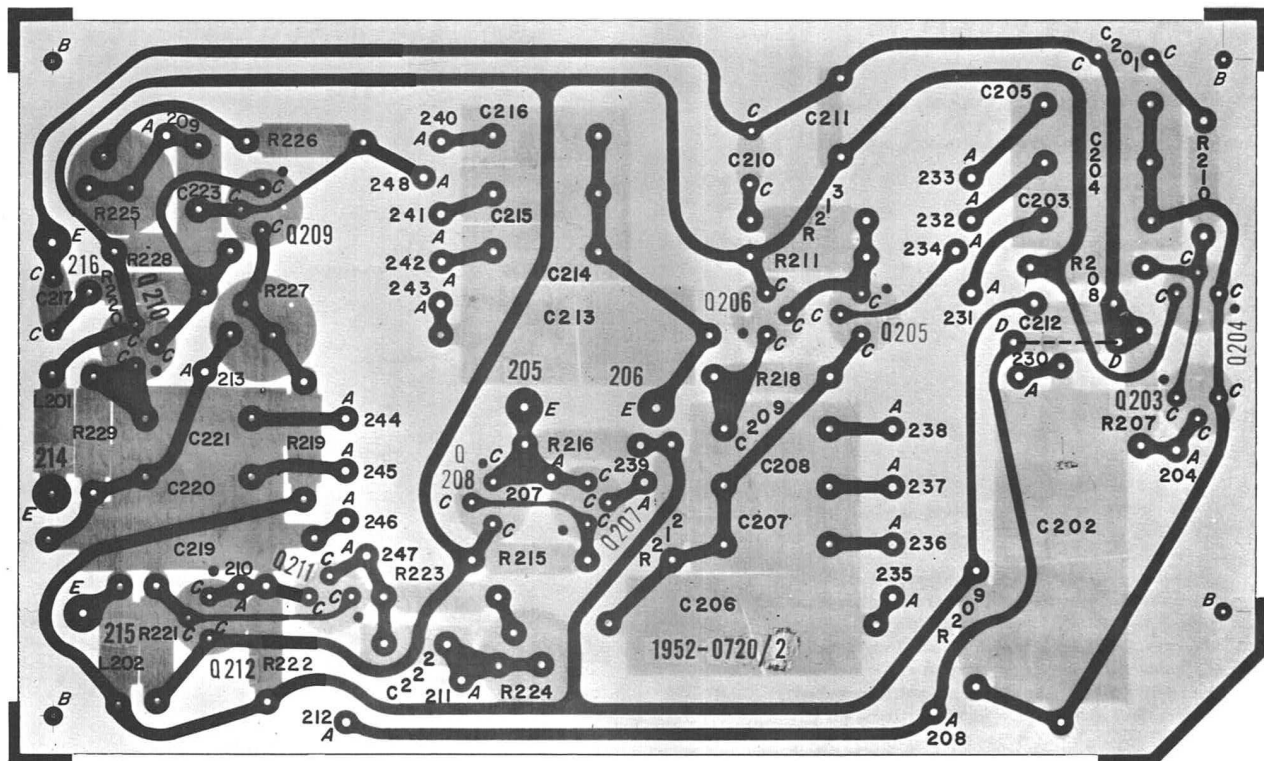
Etched Circuit Board Assembly, High-Pass Filter (P/N 1952-2720).
